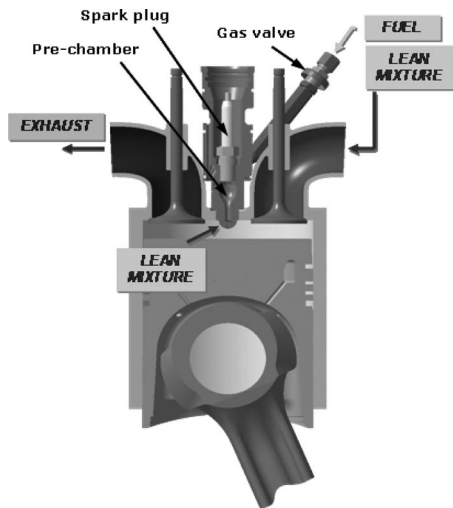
Combustion system of gas engines with a gas fuelled prechamber [4]
